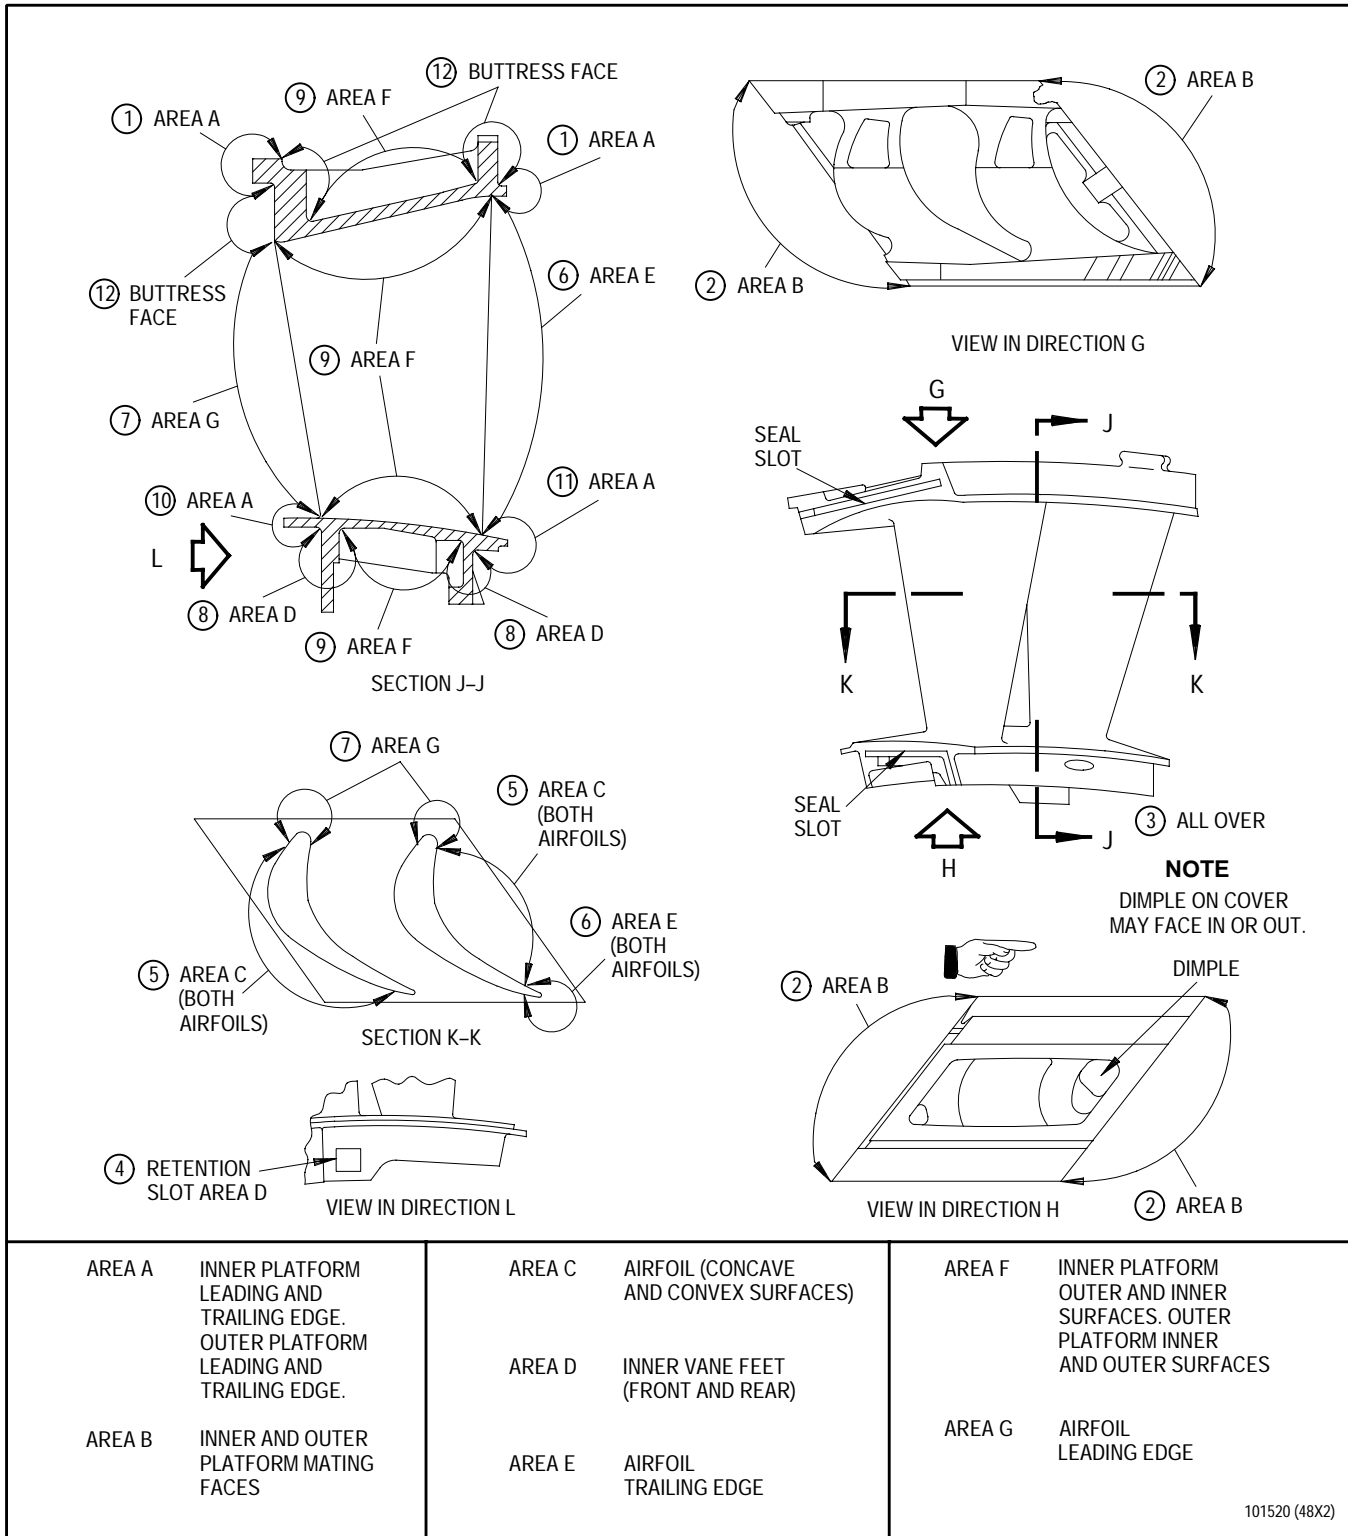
Second Stage Turbine Stator Vanes - Inspection
